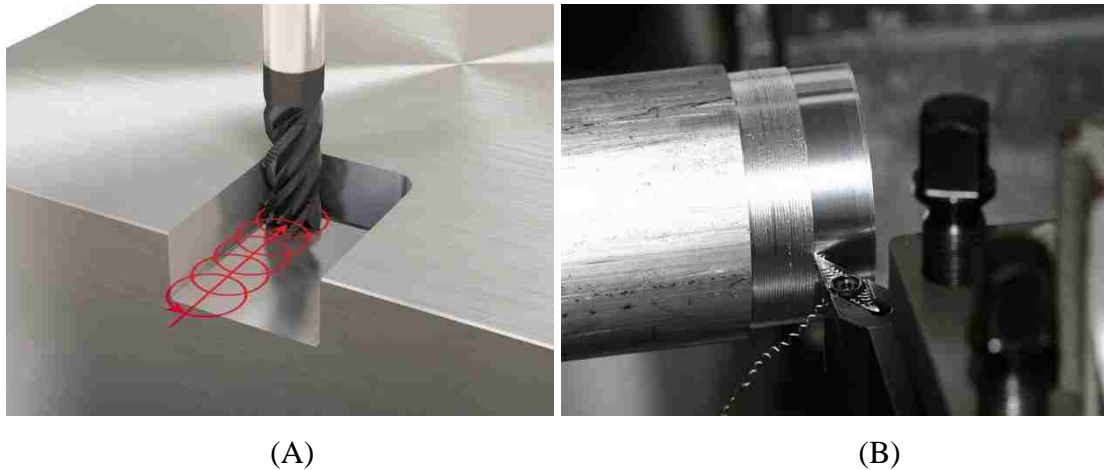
Subtracting manufacturing processes- (A) milling [5] and (B) lathe [6]
